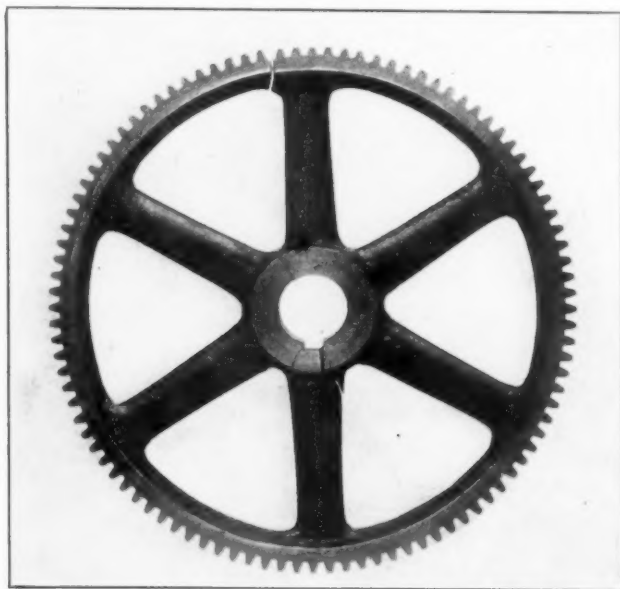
80 TOOTH ENGAGING 100 TOOTH, TEST 015, SERIES 1. 80 TOOTH
